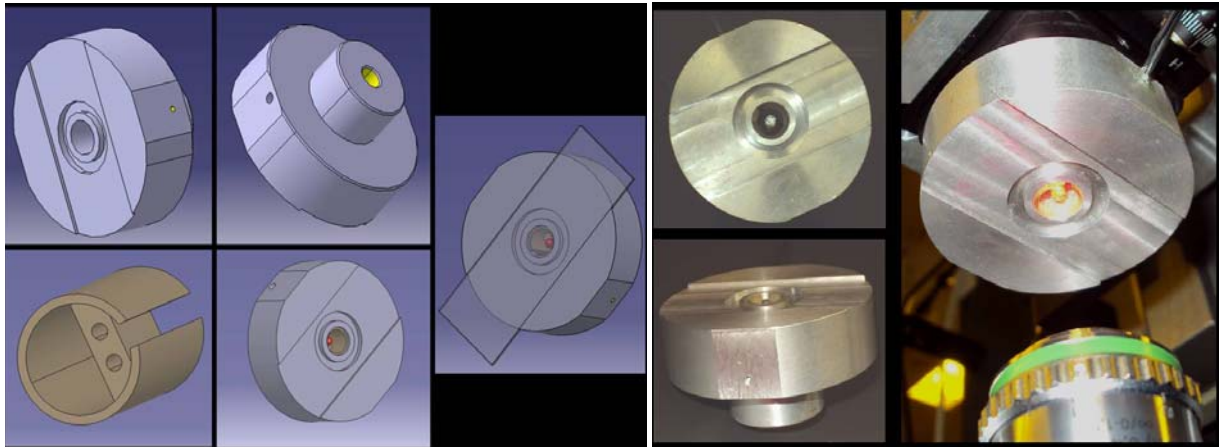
CAD file and photos of the aluminium clamp without cooling device
